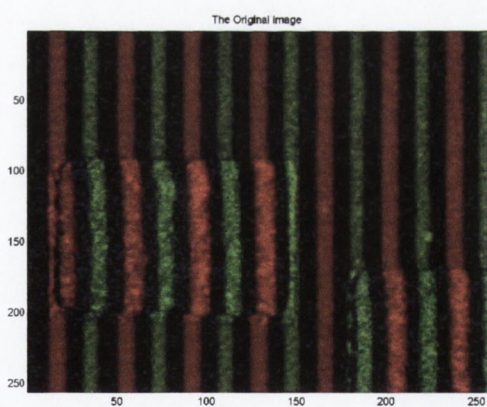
A solder paste pad of a PCB with colour fringes projection
